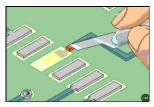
Remove the defective pad and soldermask from the connecting circuit.
